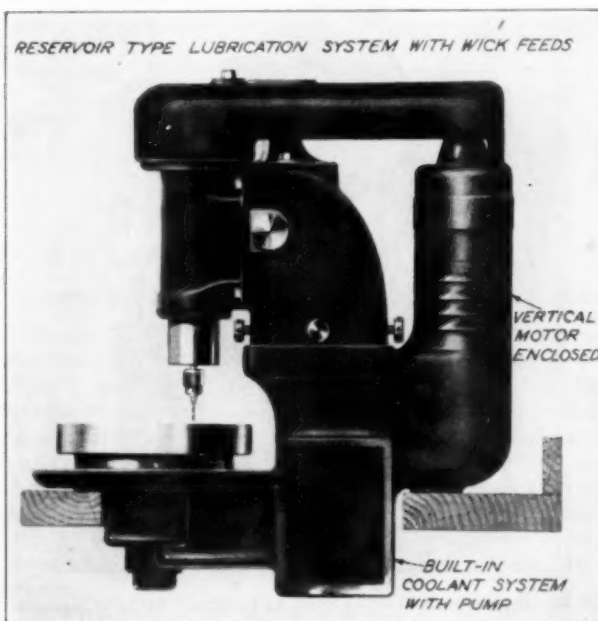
TWO-SPINDLE AUTOMATIC DRILLING MACHINE, BENCH TYPE, DIAL FEED, SIDE VIEW
